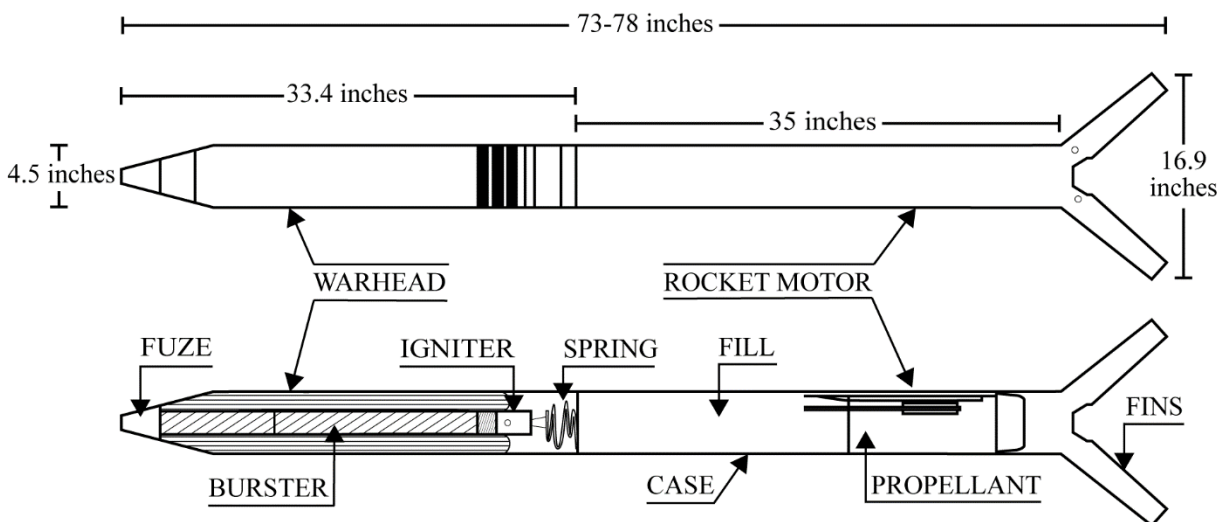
Rocket, 115-mm, M55 (T238), Bolt - Line Drawing
